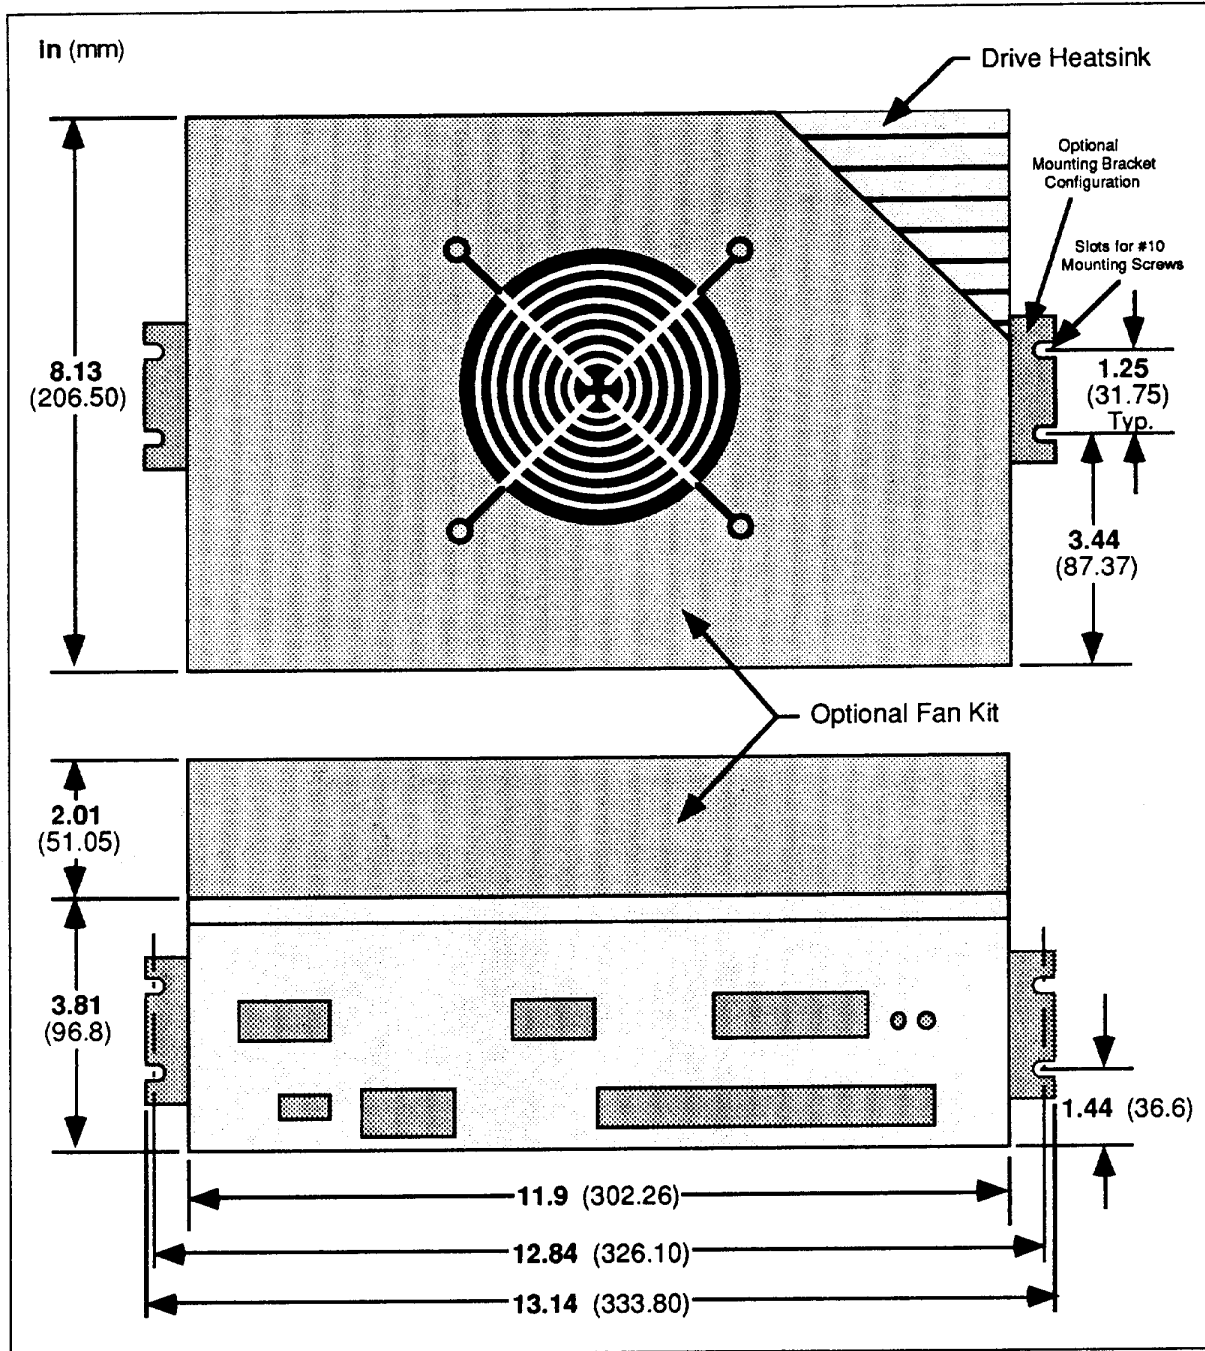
LX Dimensional Drawing (includes fan kit)
